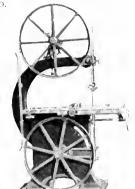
Tilted for Bevel Sawing. Crescent Angle Band Saw. Crescent Machine Co. TABLE OF POWER REQUIRED TO DRIVE WOODWORKING MACHINES BY ELECTRIC MOTOR.
